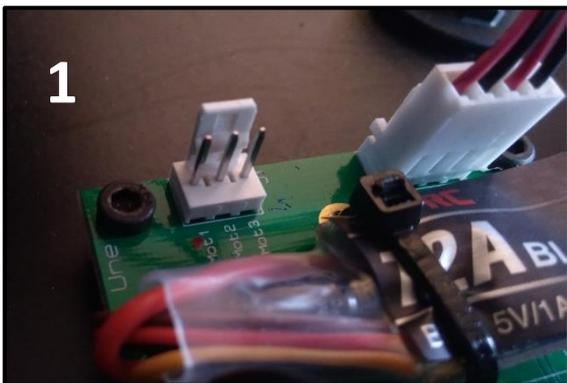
REMOVE SCANNING MIRROR CABLE
